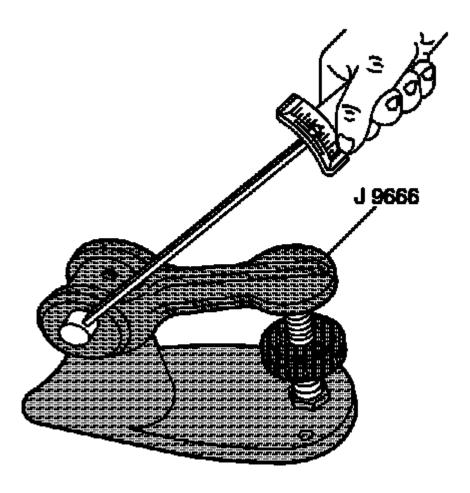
Measuring Valve Spring Tension Courtesy of GENERAL MOTORS CORP.
